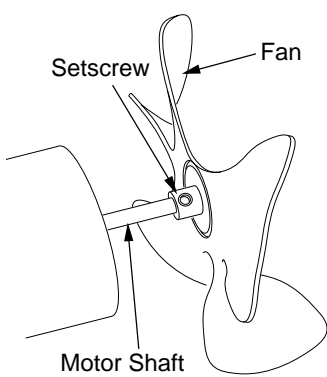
Fan, Motor Shaft, and Setscrew Location
